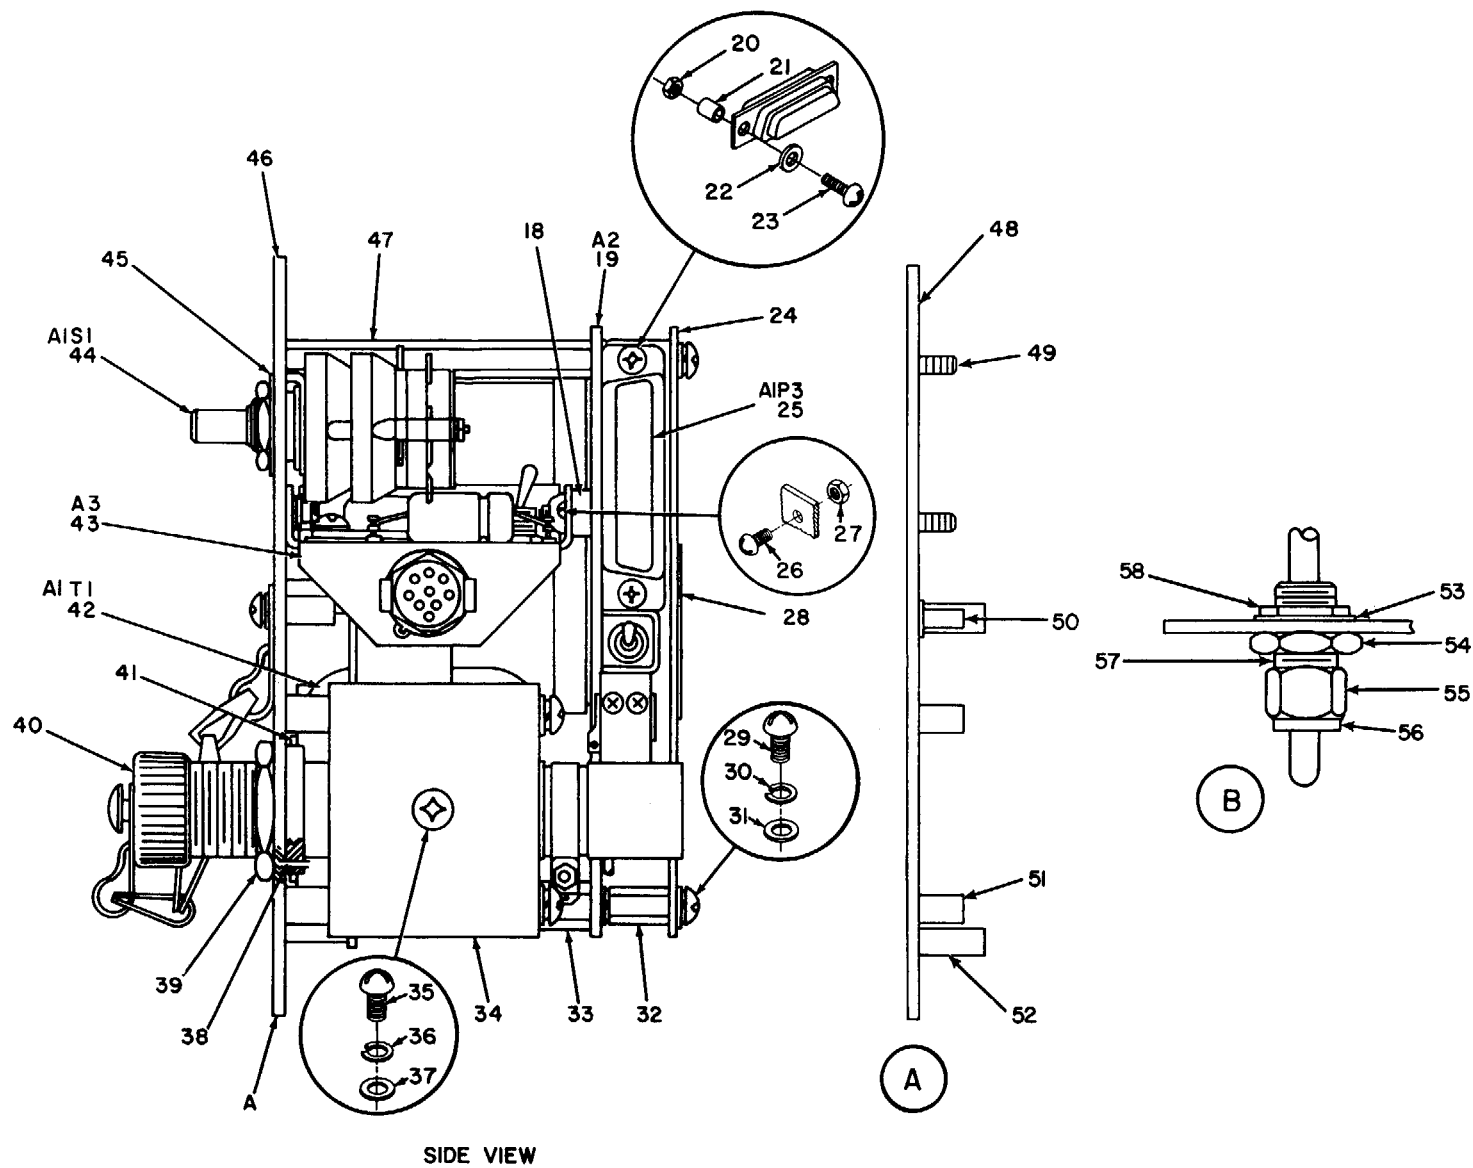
Front Panel Assembly (Sheet 1 of 2).
